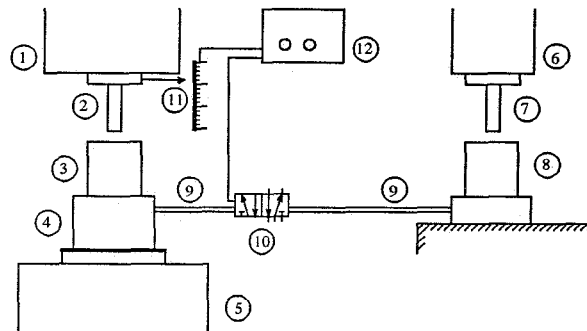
Complete setup: 1. upper part press; 2. piston; 3. buffer for rubber; 4. mould; 5. lower part press; 6. press; 7. piston; 8. buffer for oil; 9. pipe; 10. 5/2 valve; 11. position detector; 12. control unit
